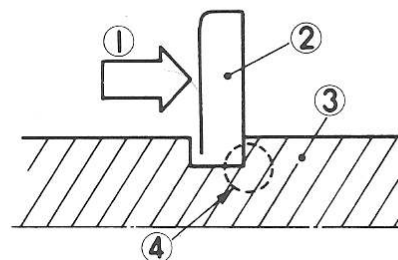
A.17 When reinstalling the clutch housing on YT 60 models, the sharp edge of the snap-ring must face out (Sec 12)
